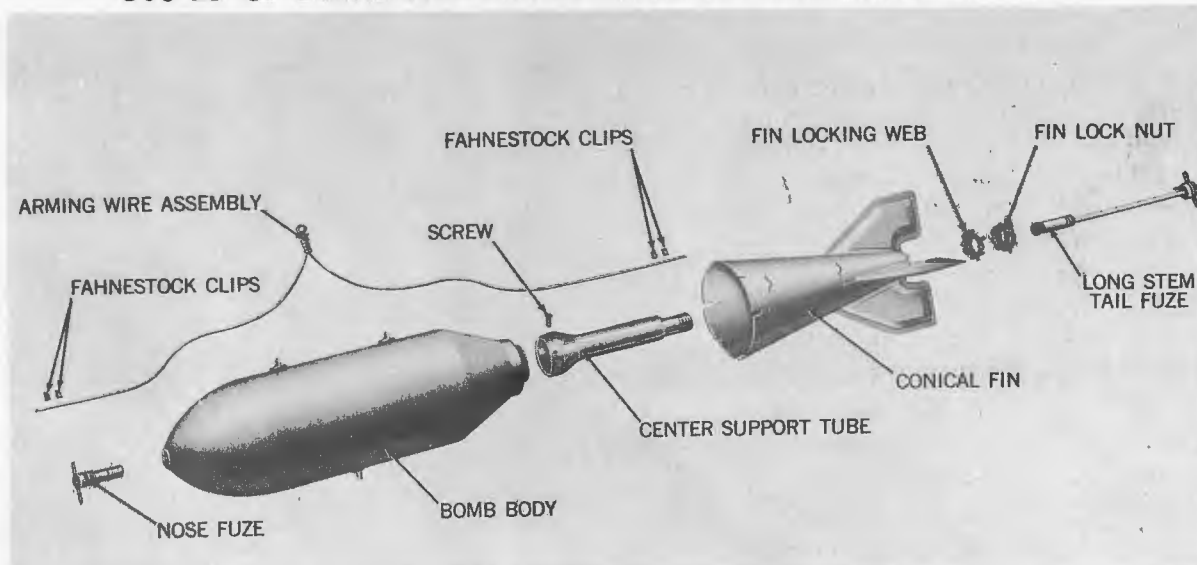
500-lb GP Bomb AN-M64A1 with Fin Assembly M128A1, Exploded View.
